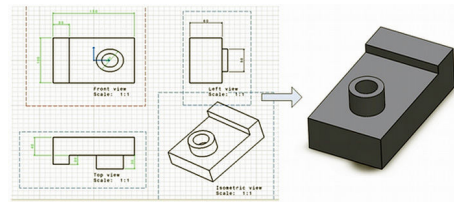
The 3D CAD part used in the evaluation study: the 2D drawing and the 3D CAD model.
